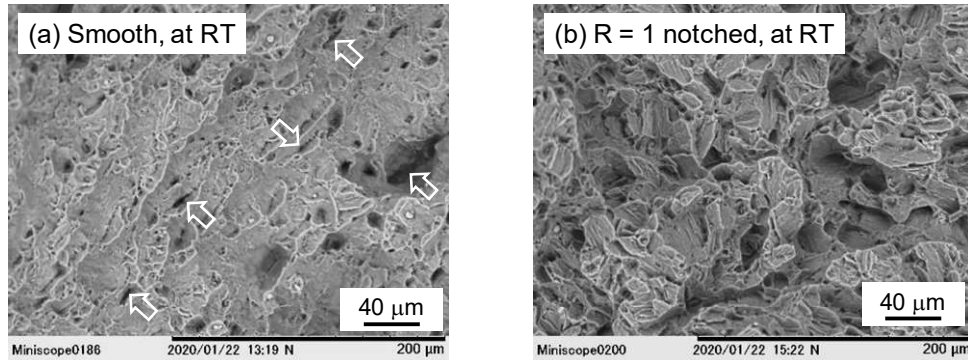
Tensile fracture surfaces of the (a) smooth specimen and (b) R = 1 notched specimen tested at RT.
